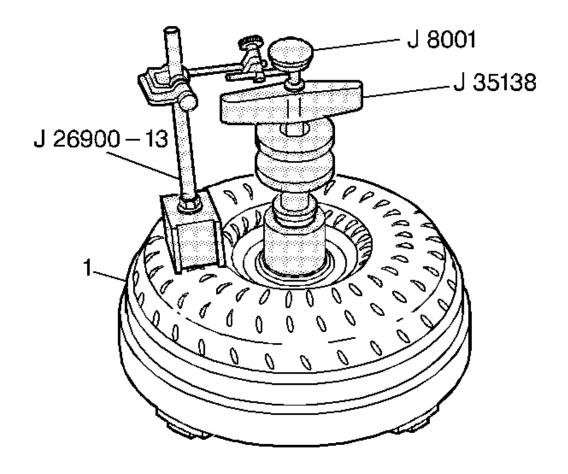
View Of J 26900-13, J 8001 & J 35138 Installed On Torque Converter Courtesy of GENERAL MOTORS CORP.
